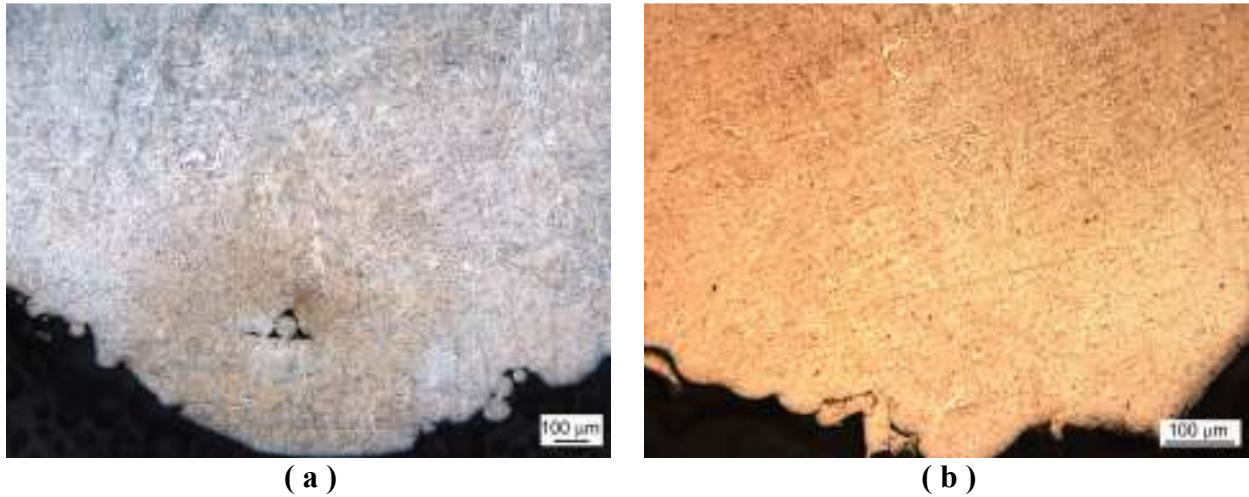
Optical image at lower part of the cross-sections a) 12 mm diameter bar built with box support b) 16 mm diameter bar built with box support
